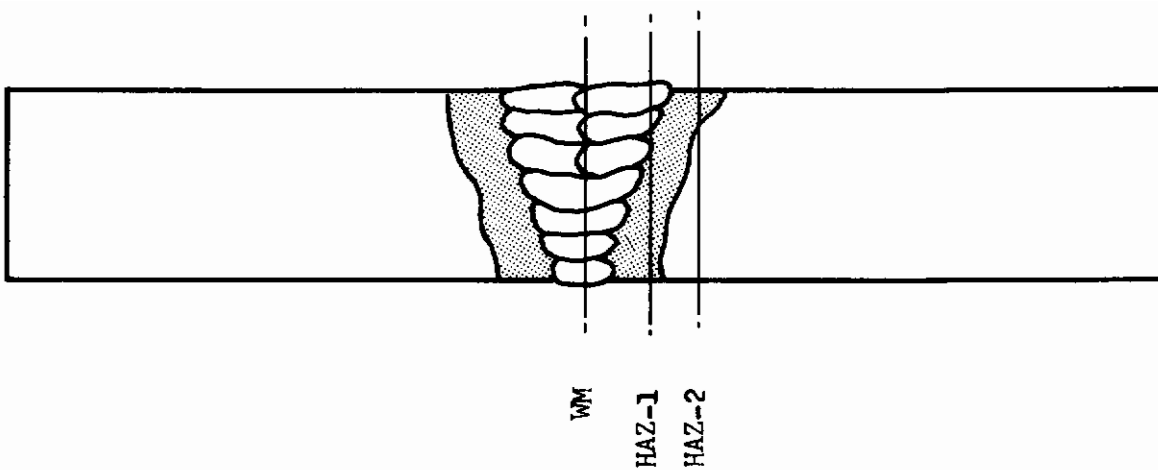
Schematic Diagram Showing Notch Location for Pre-cracked-Charpy-Impact Specimens Prepared from Weldments in Grade 200, 1/2-In.-Thick, 18% Nickel Maraging Steel Plate, Heat 10675
